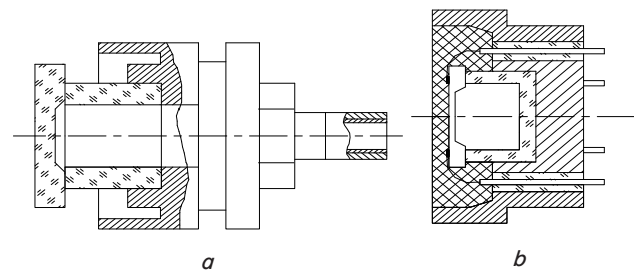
Designs of sensor sensing elements: a – for overpressure; b – absolute pressure
